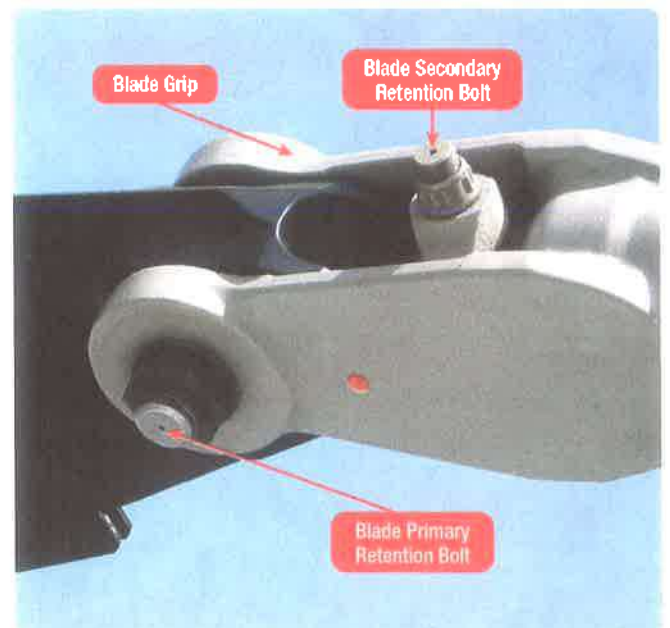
Method of blade attachment for Bell 206 helicopter.
